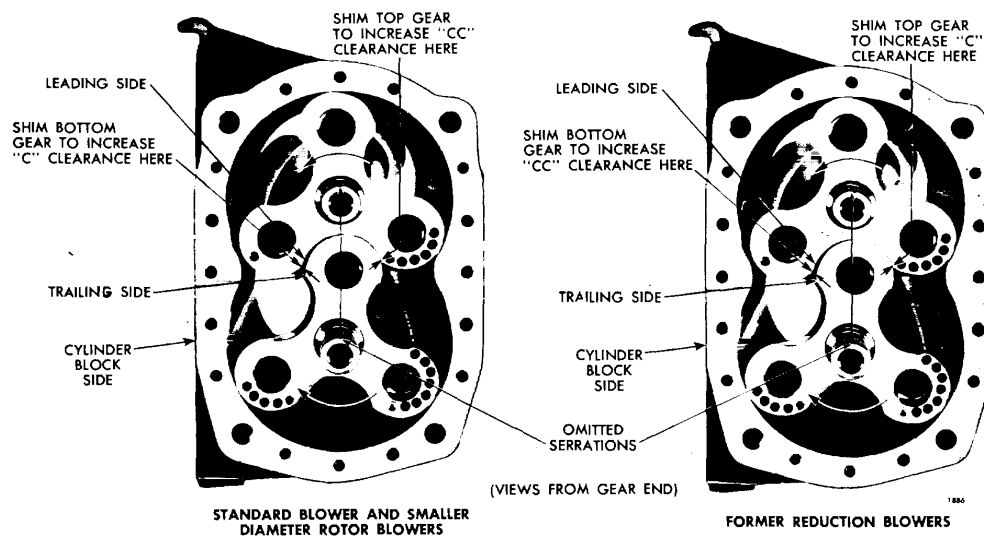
Diagram Showing Proper Location of Shims for Correct Rotor Lobe Clearances
